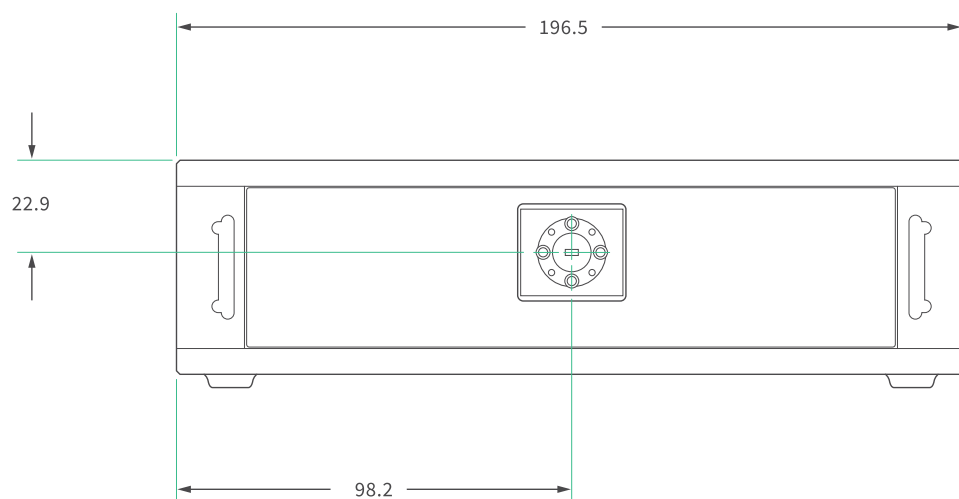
mmRH-5591/5592 Mechanical Dimensions, Rear View
